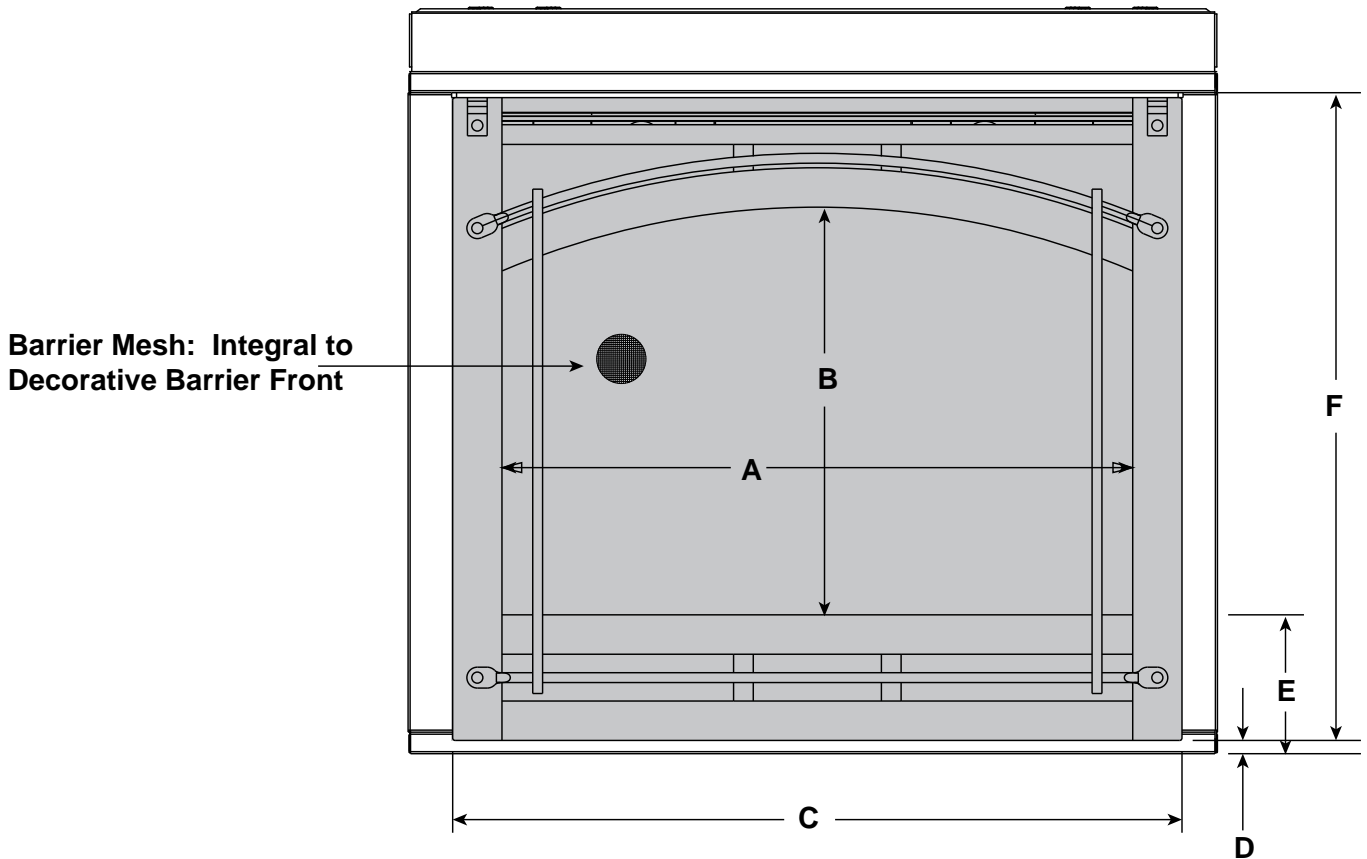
Decorative Barrier Front Dimensions - Halston
